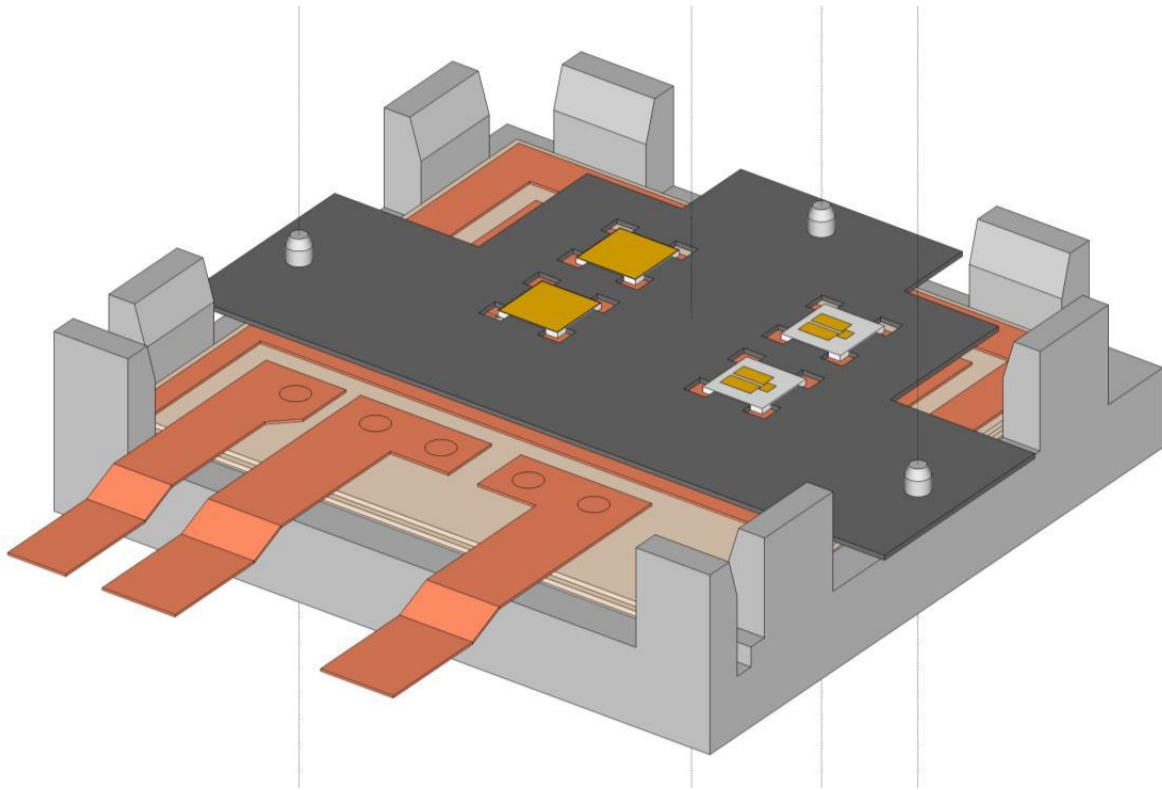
Assembly jig designed to constrain module components during fabrication and align TLP bonds and device terminal pads.
